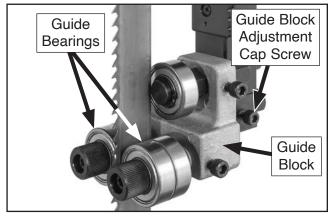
Upper guide bearing components (guide post cover removed for clarity).
